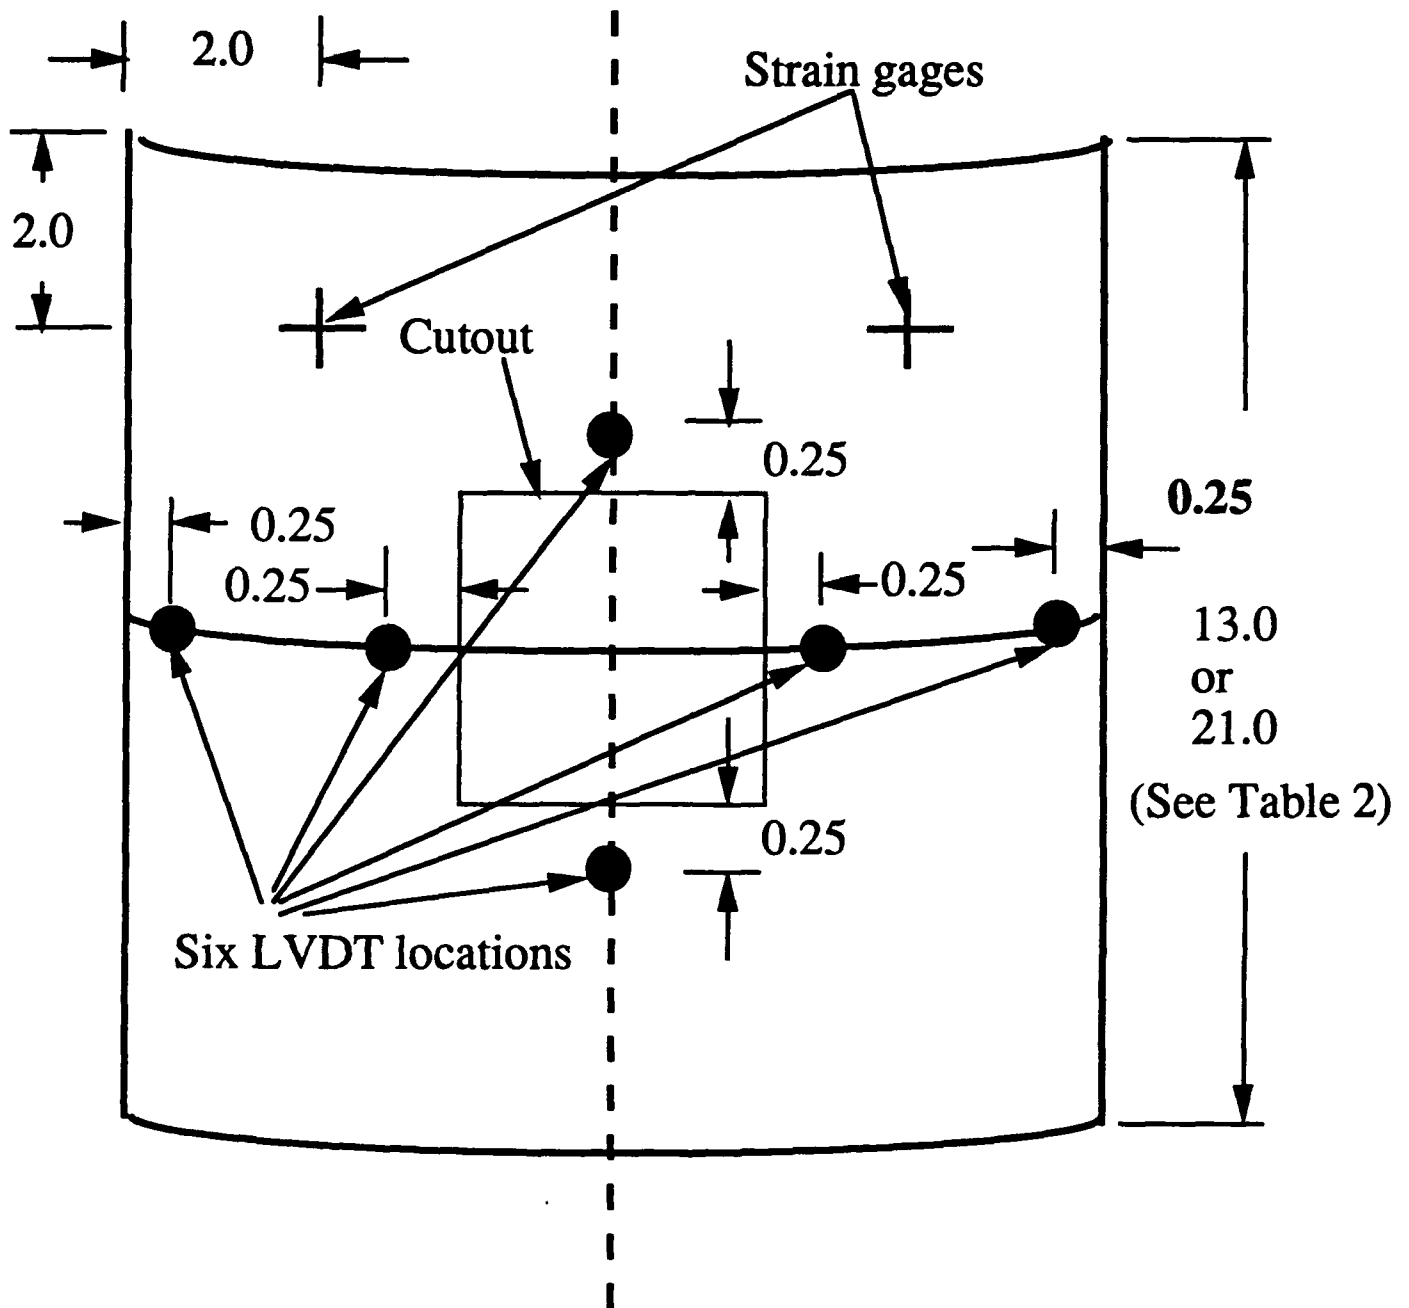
LVDT and Strain Gage Locations, Panels With Cutouts
